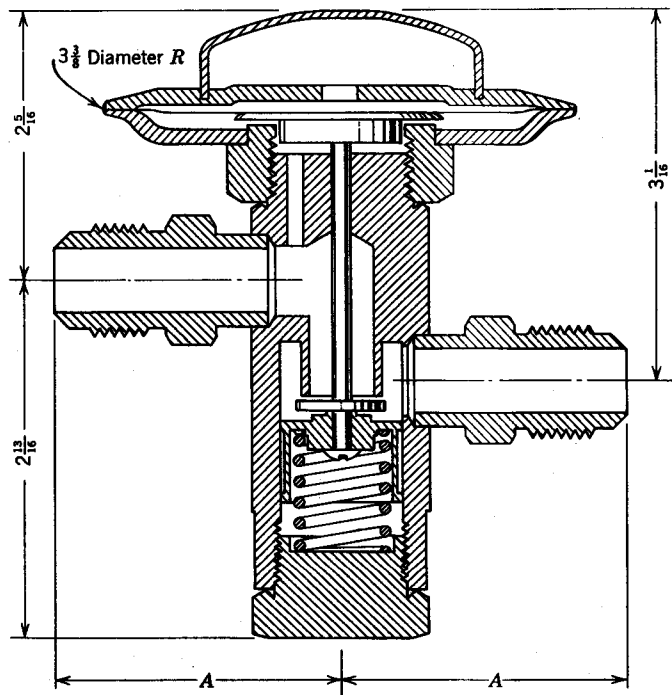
Crankcase pressure regulator. (Courtesy Sporlan Valve Company.)
